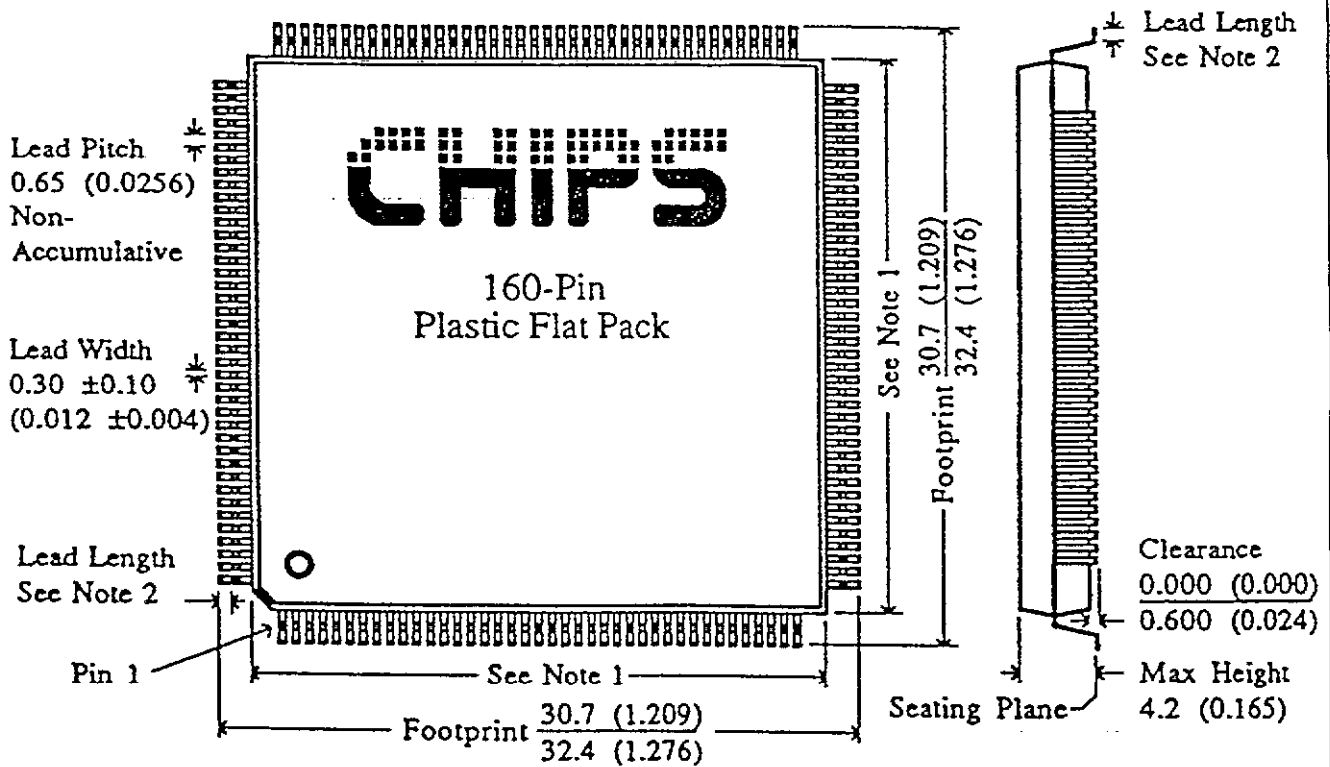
82C311 Mechanical Dimensions (Revision B and C)
